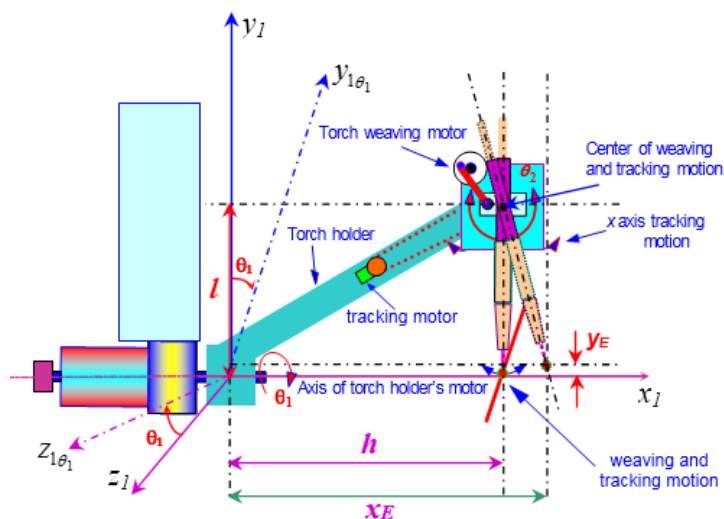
Mechanism of the torch holder and mechanism of the weaving torch
